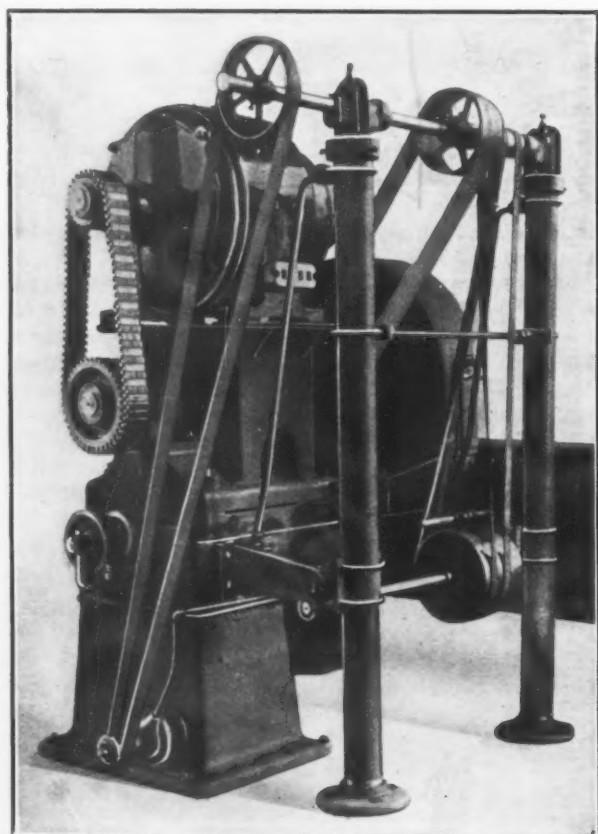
Detail Rear View of the Motor-Driven Machine.
